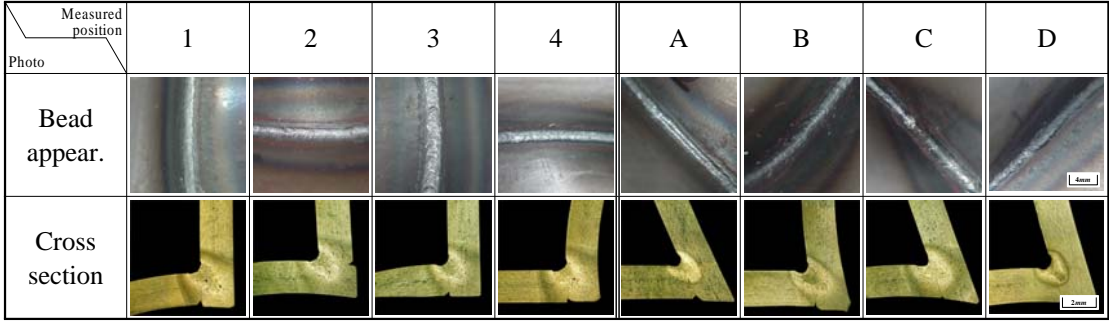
Bead appearance and cross section of weldment in laser welding
